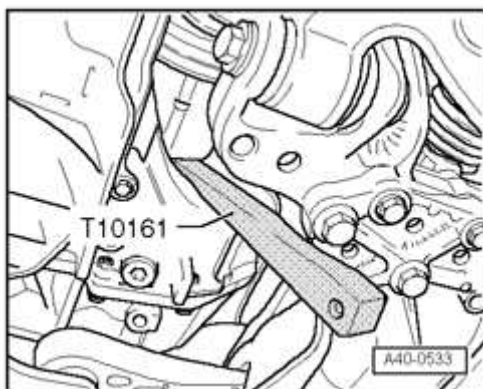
Wedge Tool T10161 Attached Between Transmission Housing And Triple Roller Joint
